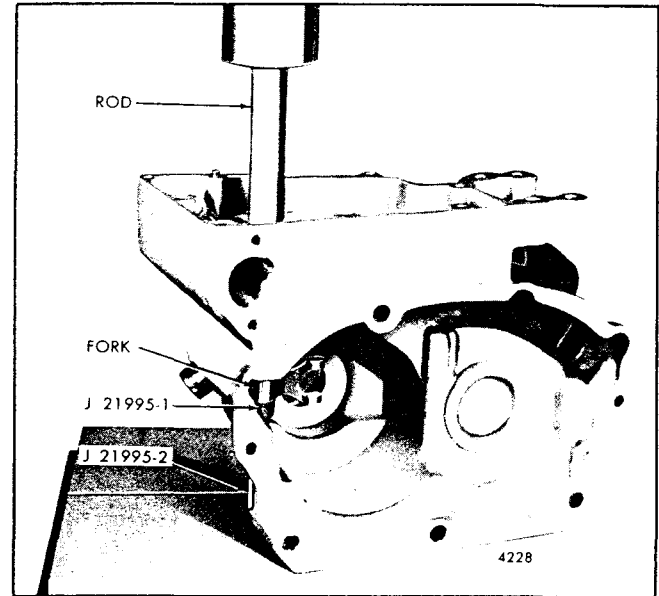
Installing Governor Operating Shaft Fork on Operating Shaft and Bearing Assembly
